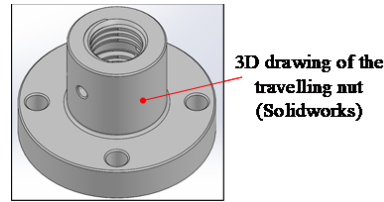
Design process of the travelling nut, showing the 3D drawing obtained by using the SolidWorks software
